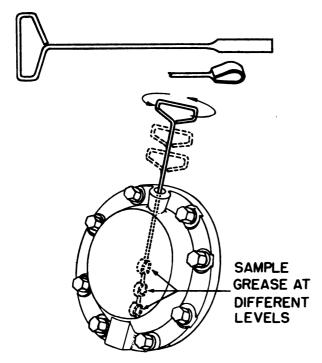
A probe is a handy way of checking the grease in a bearing without removing the cap
